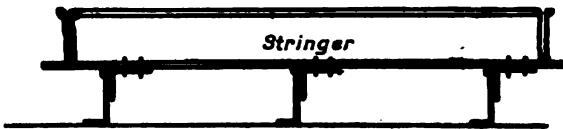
Bulb Angle Frames with large Lug for Stringer Connection.
